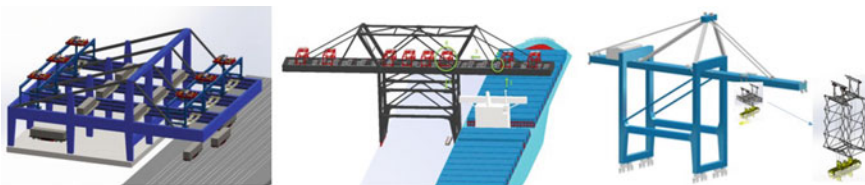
Floating cranes design: rotate crane design (*left*), double-sided carrier crane (*center*) and feeder crane (*right*)
